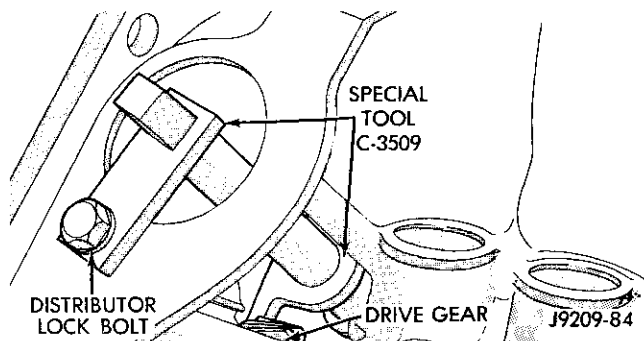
Camshaft Holding Tool C-3509 (Installed Position)
